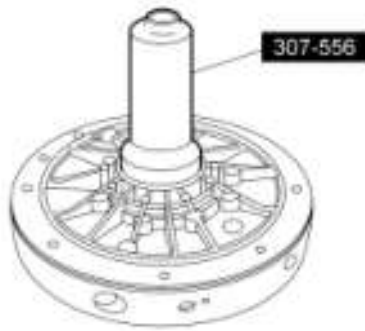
Installing Front Pump Seal Using Special Tool (307-556)
